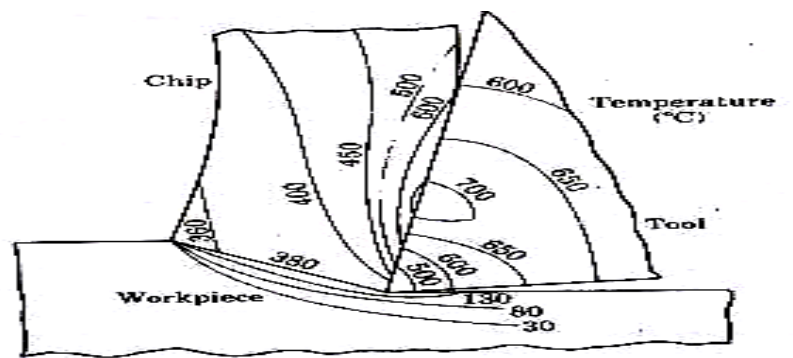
The relationship between tool temperature, gram and workpiece in the process CNC lathe machining
